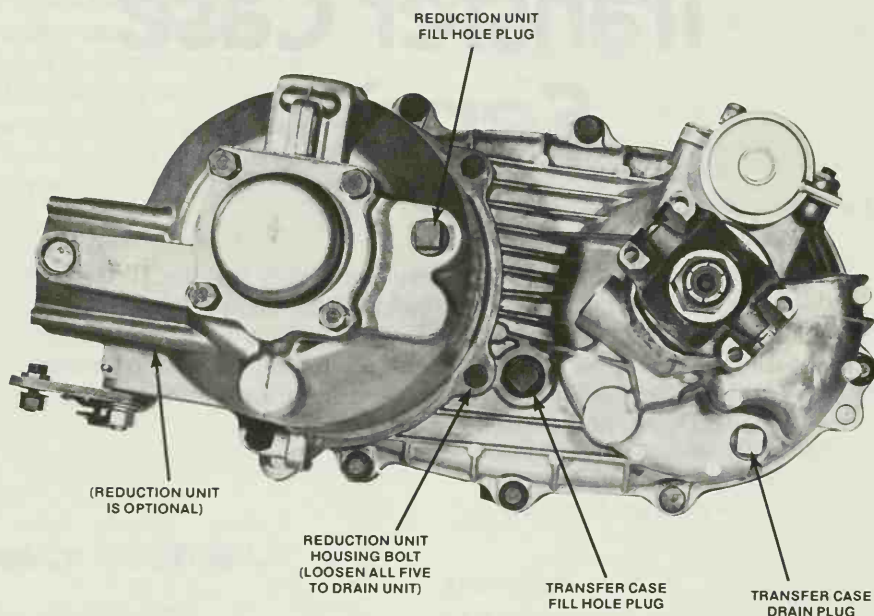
The fill plug is used to fill and inspect lubricant level. (American Motors Corporation)
